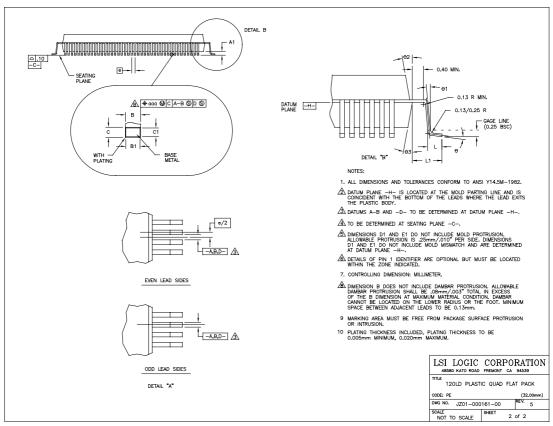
120-Pin PQFP (PE) Mechanical Drawing
